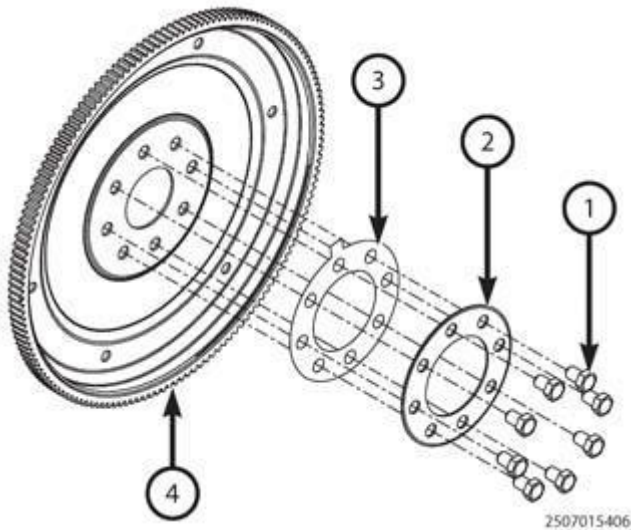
Bolts, Clamp Ring, Shim & Flex Plate
